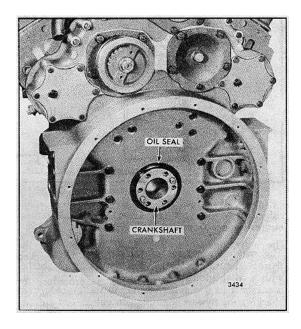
Crankshaft Rear Oil Seal Mounting
